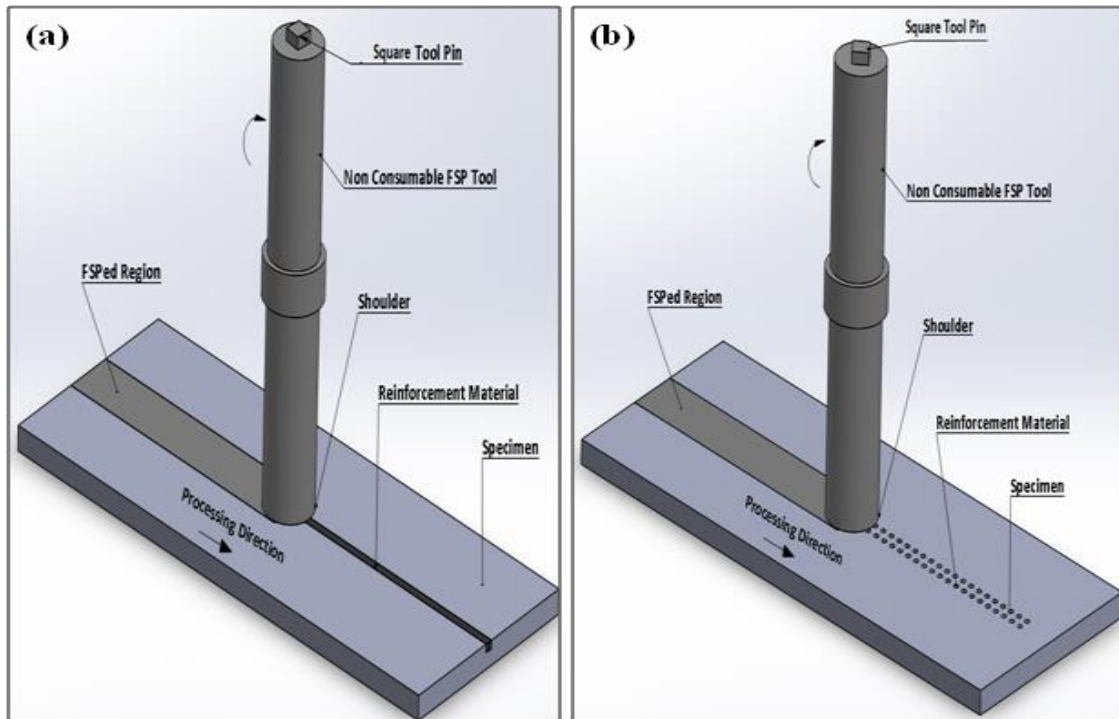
(a, b) Schematic drawing of square pin profile with groove and holes methods
